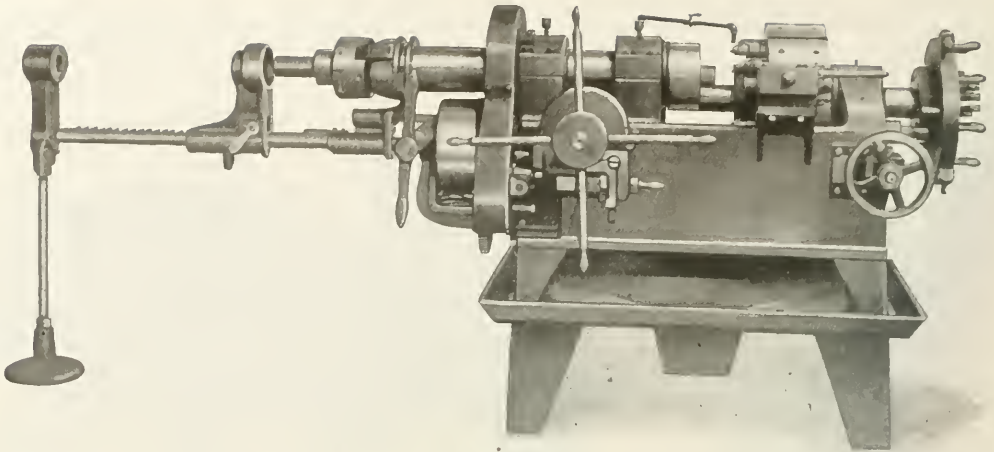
Type H Semi-automatic Fuse Socket Lathe
